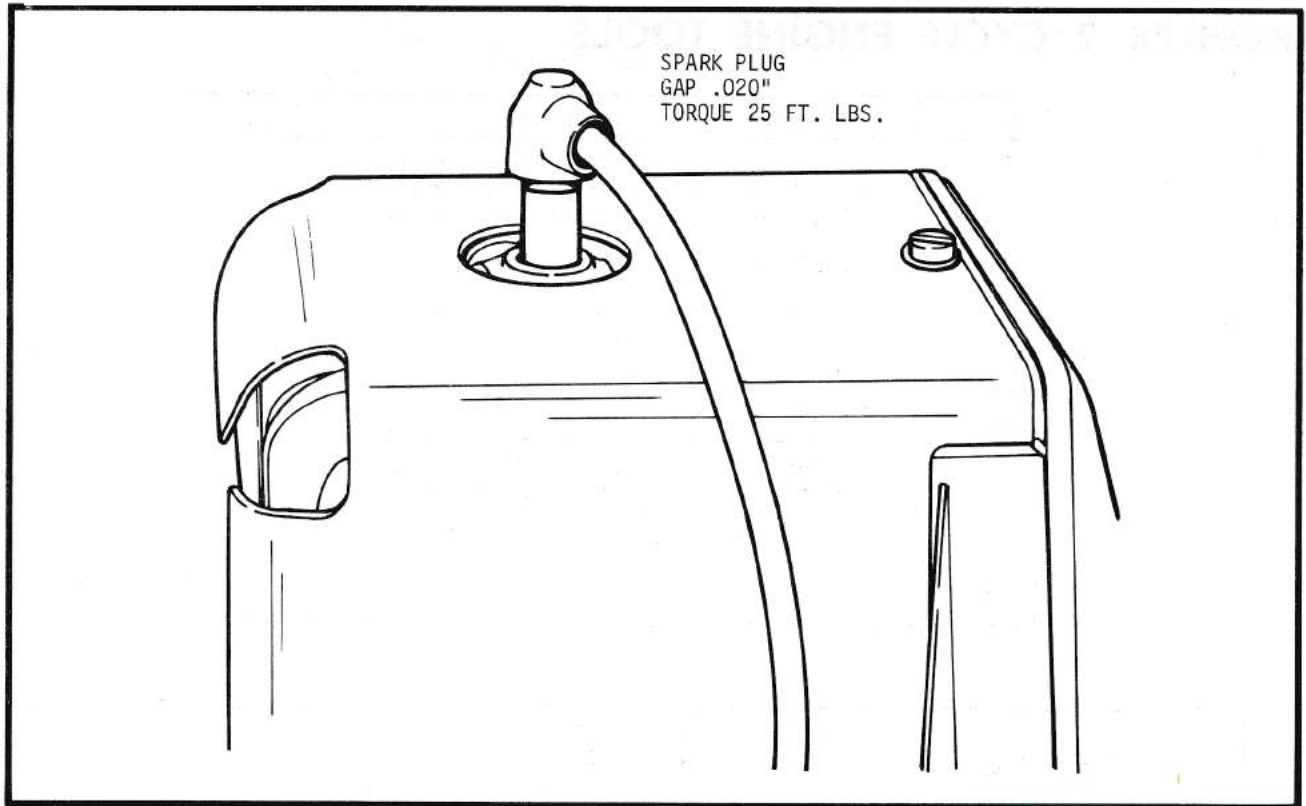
AIR SHROUD COVER, SPARK PLUG DETAIL
